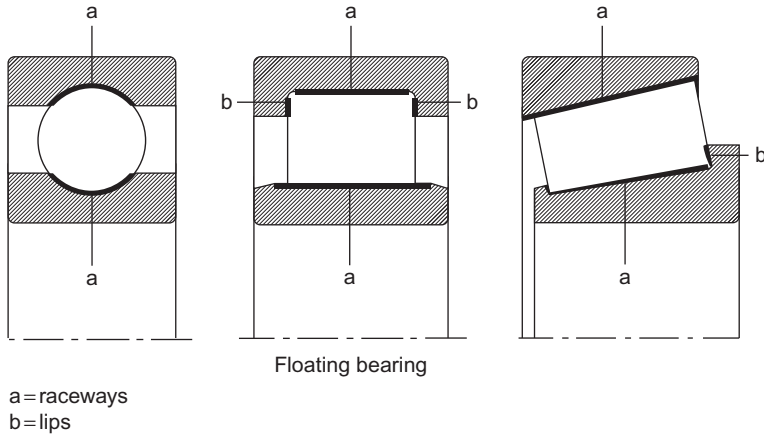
Raceway grooves and lips for typical roller bearings (courtesy FAG bearings).
